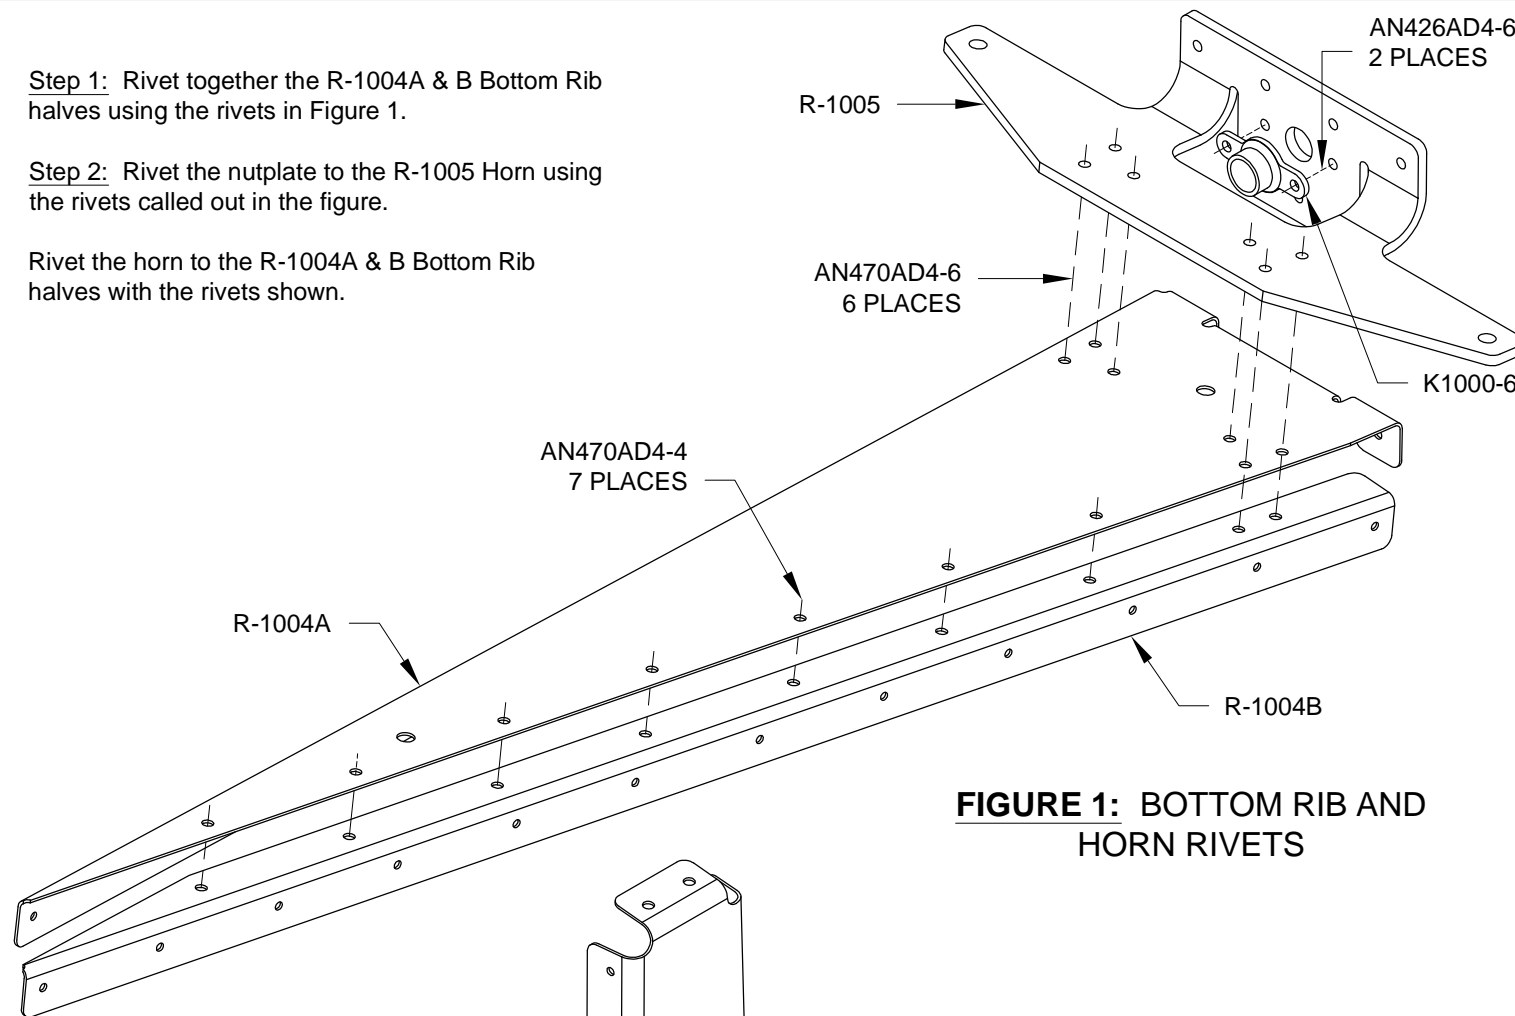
BOTTOM RIB AND HORN RIVETS
